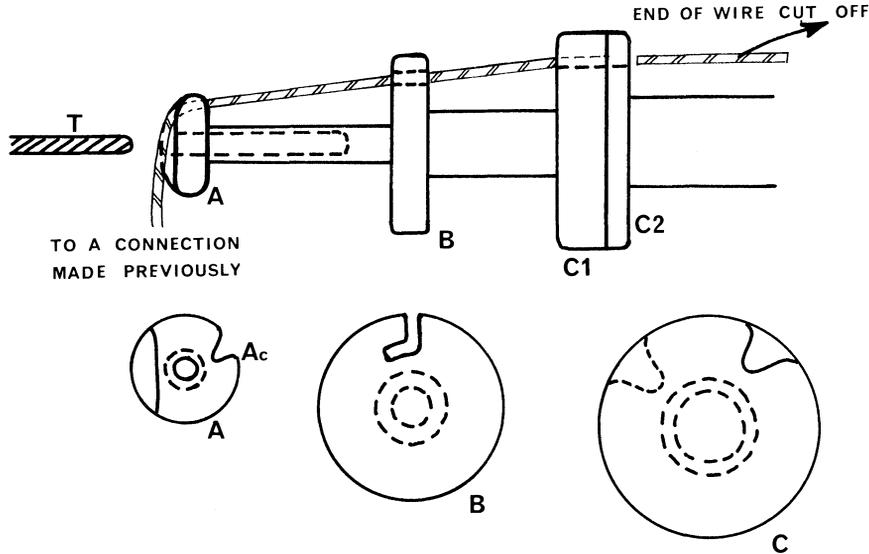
Diagram of a Cut-Strip and Wrap tool tip.
